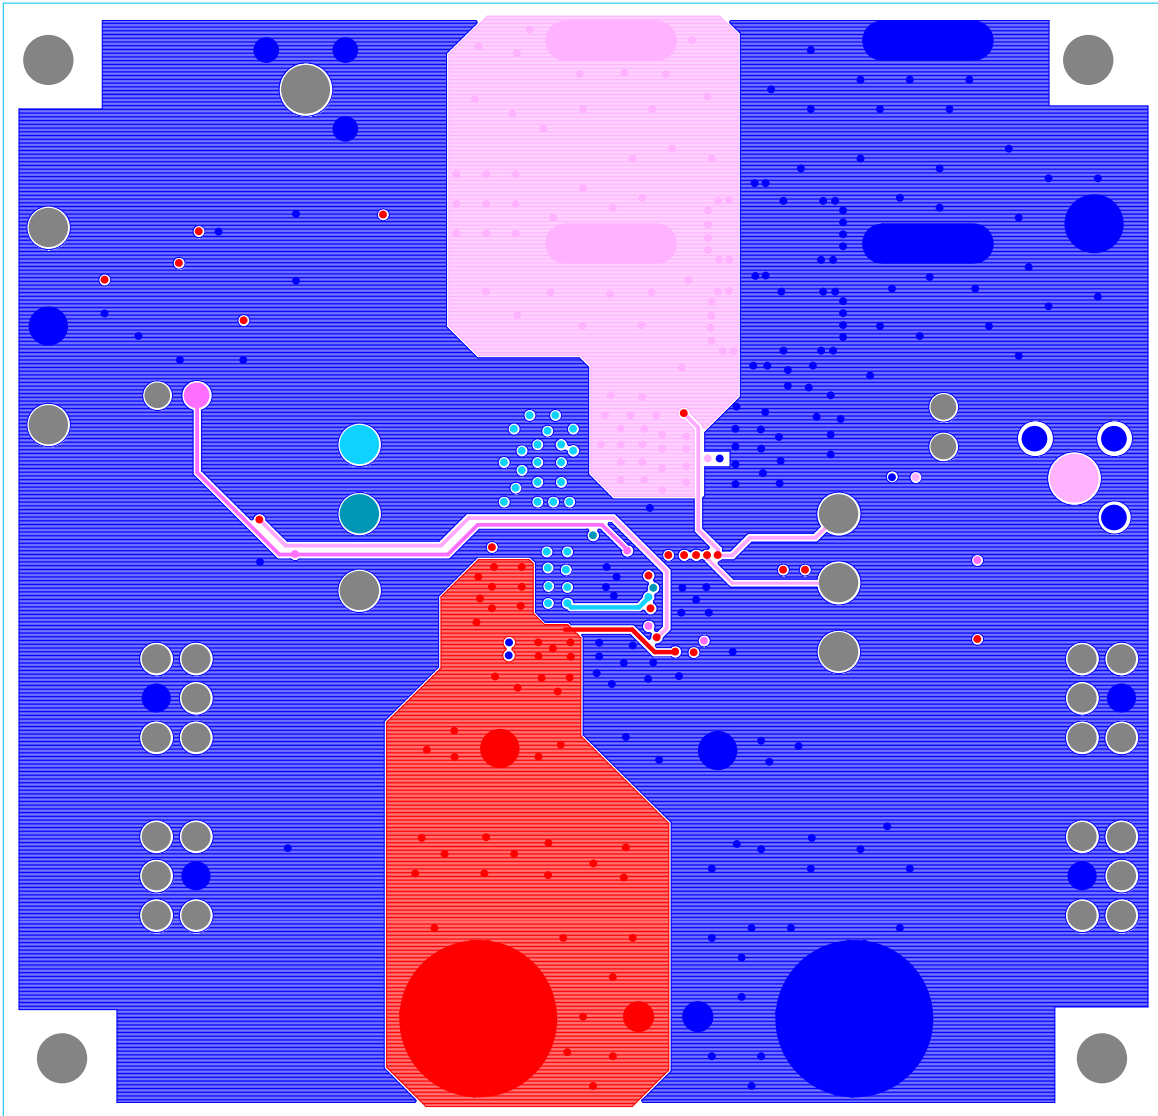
PCB - INNER LAYER 4 (TOP VIEW)
